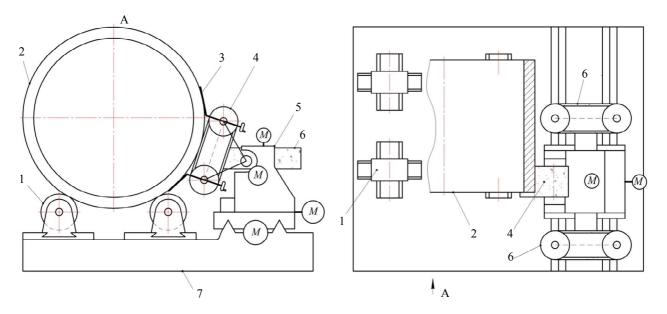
Application scheme of the robotic machine-tool for grinding shells and cases 1 – adjustable support with a roller; 2 – shell; 3 – control bodies of uncertainty of basing; 4 – grinding tool for the outer surface; 5 – support; 6 – grinding tools for face surfaces; 7 – mobile platform
